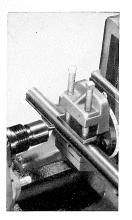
Milling a keyway with  $\frac{1}{4}$  inch end mill.
